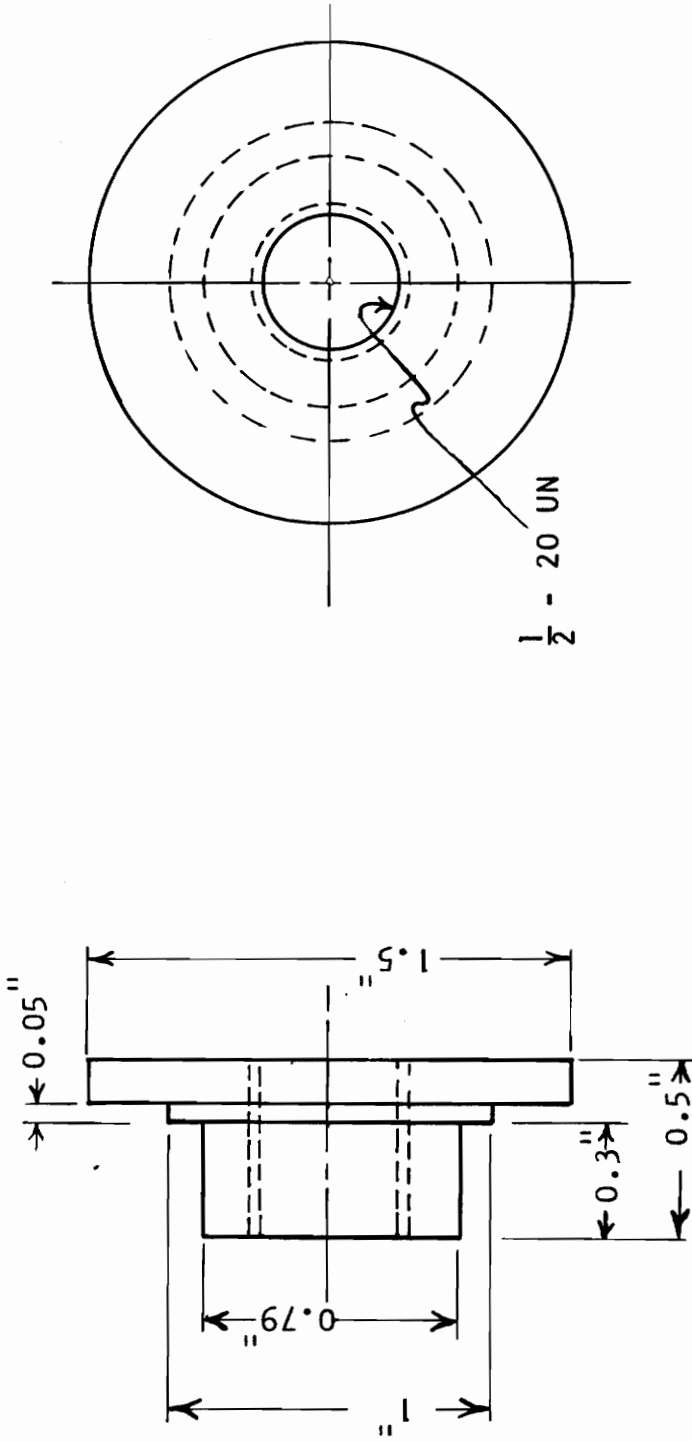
Diagram of Sensor Disk Holder Retainer Nut
